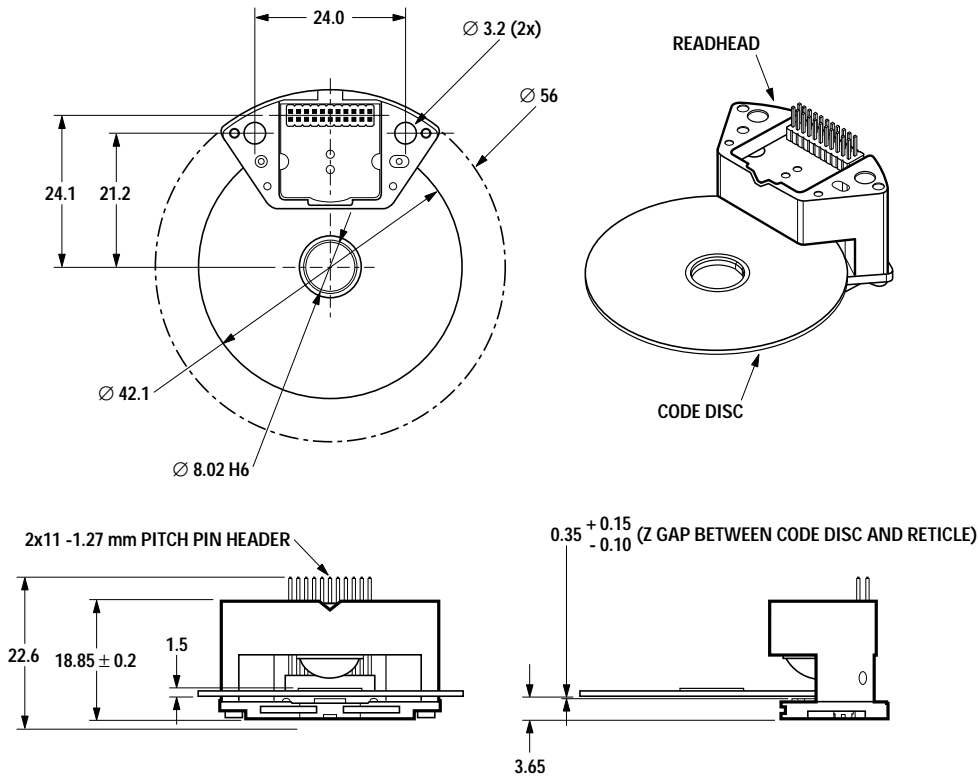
Package dimensions of single turn absolute module – AEAS-7000.
